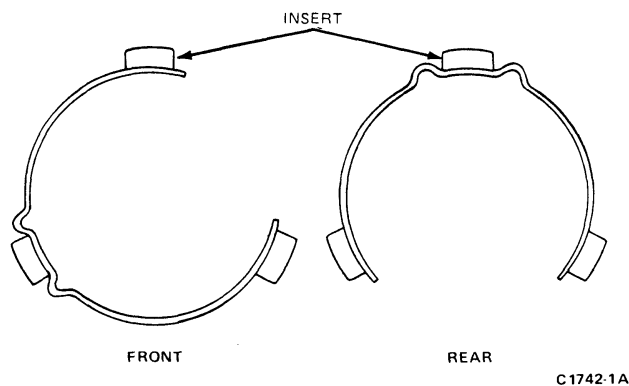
First-and-Reverse Synchronizer Insert Spring Installation
